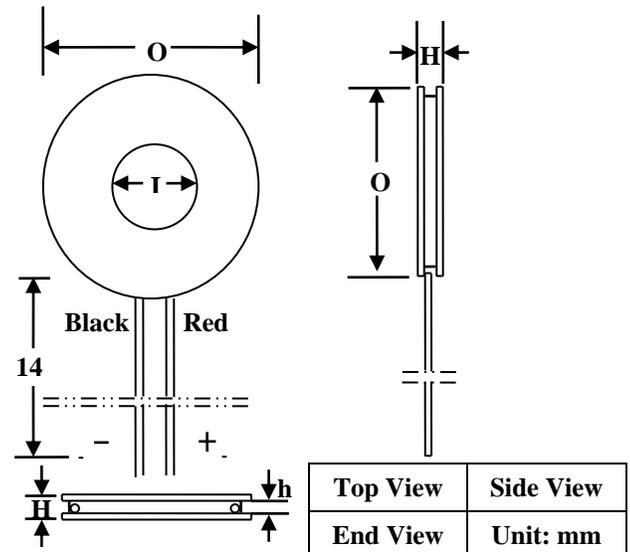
Mechanical dimensions of ATEC1-38-3.4A
